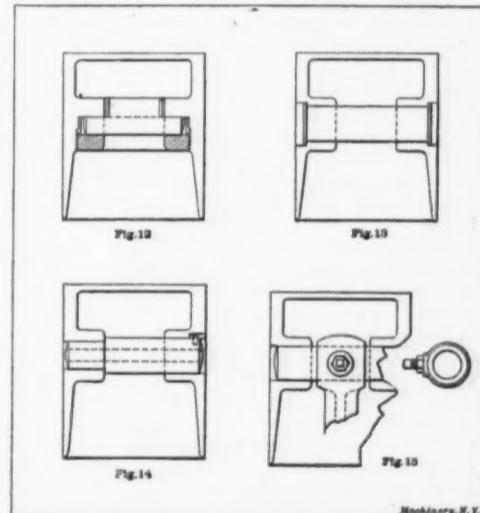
Nut method of securing pin. Fig. 13.—Pin with end bosses. Fig. 14.—Two-step pin with drive-fit end and key.
